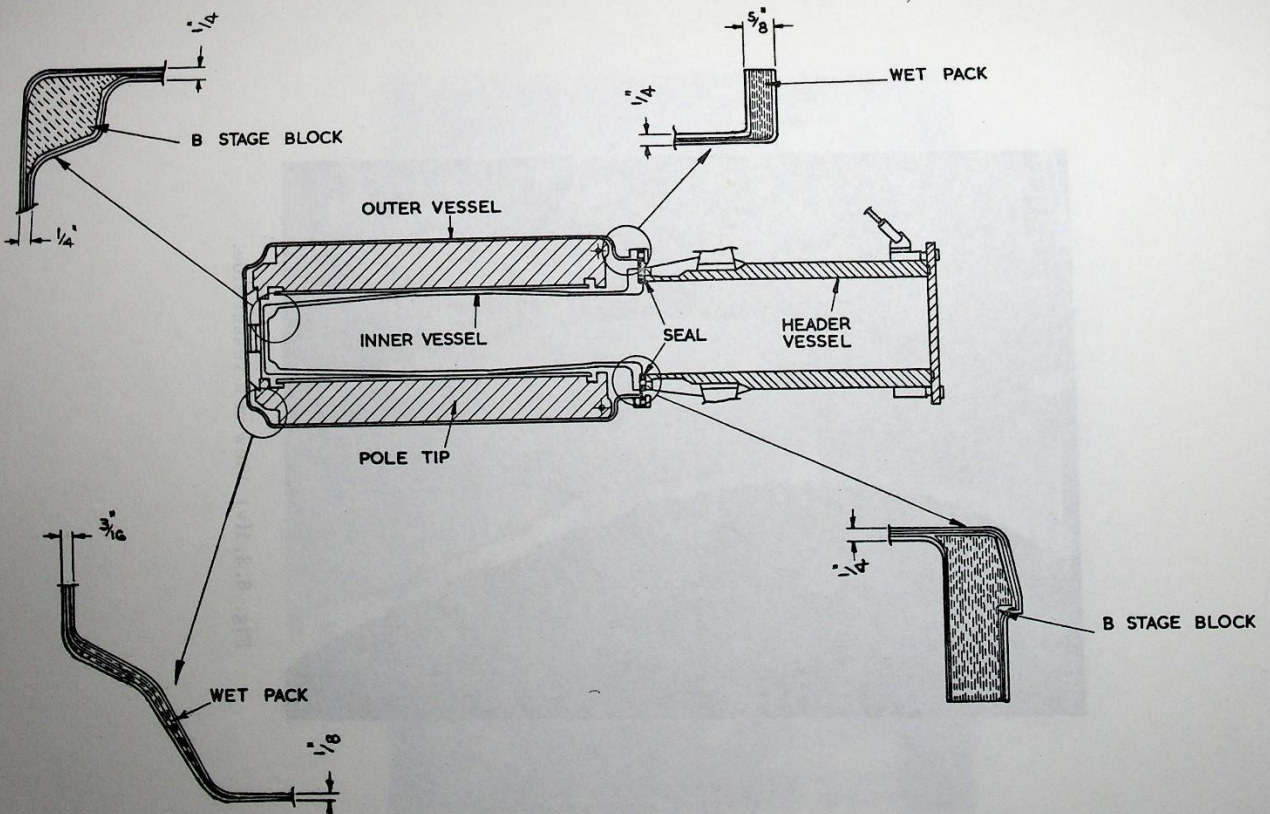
I(iv) Cross section of Vessel and Flanges showing "B" stage Blocks and "Wet Packs".
